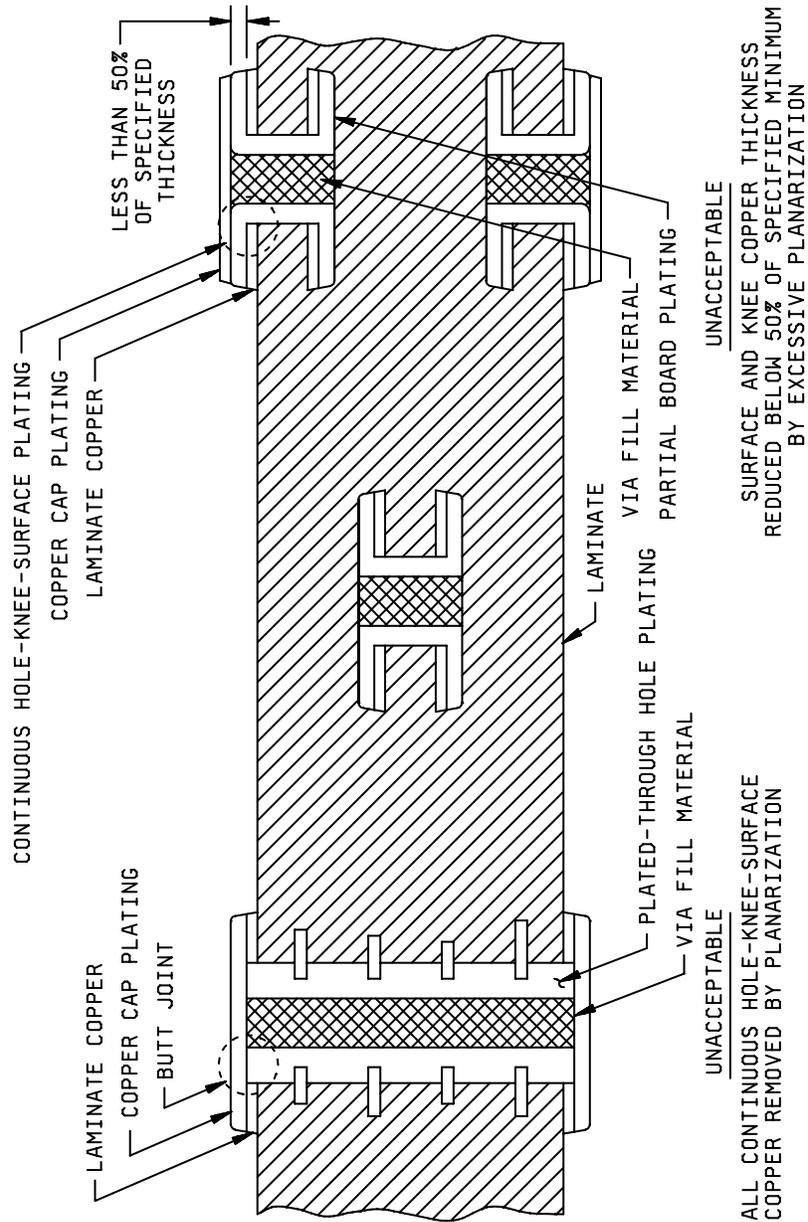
Unacceptable plated-through hole continuous hole-knee-surface copper plating.
